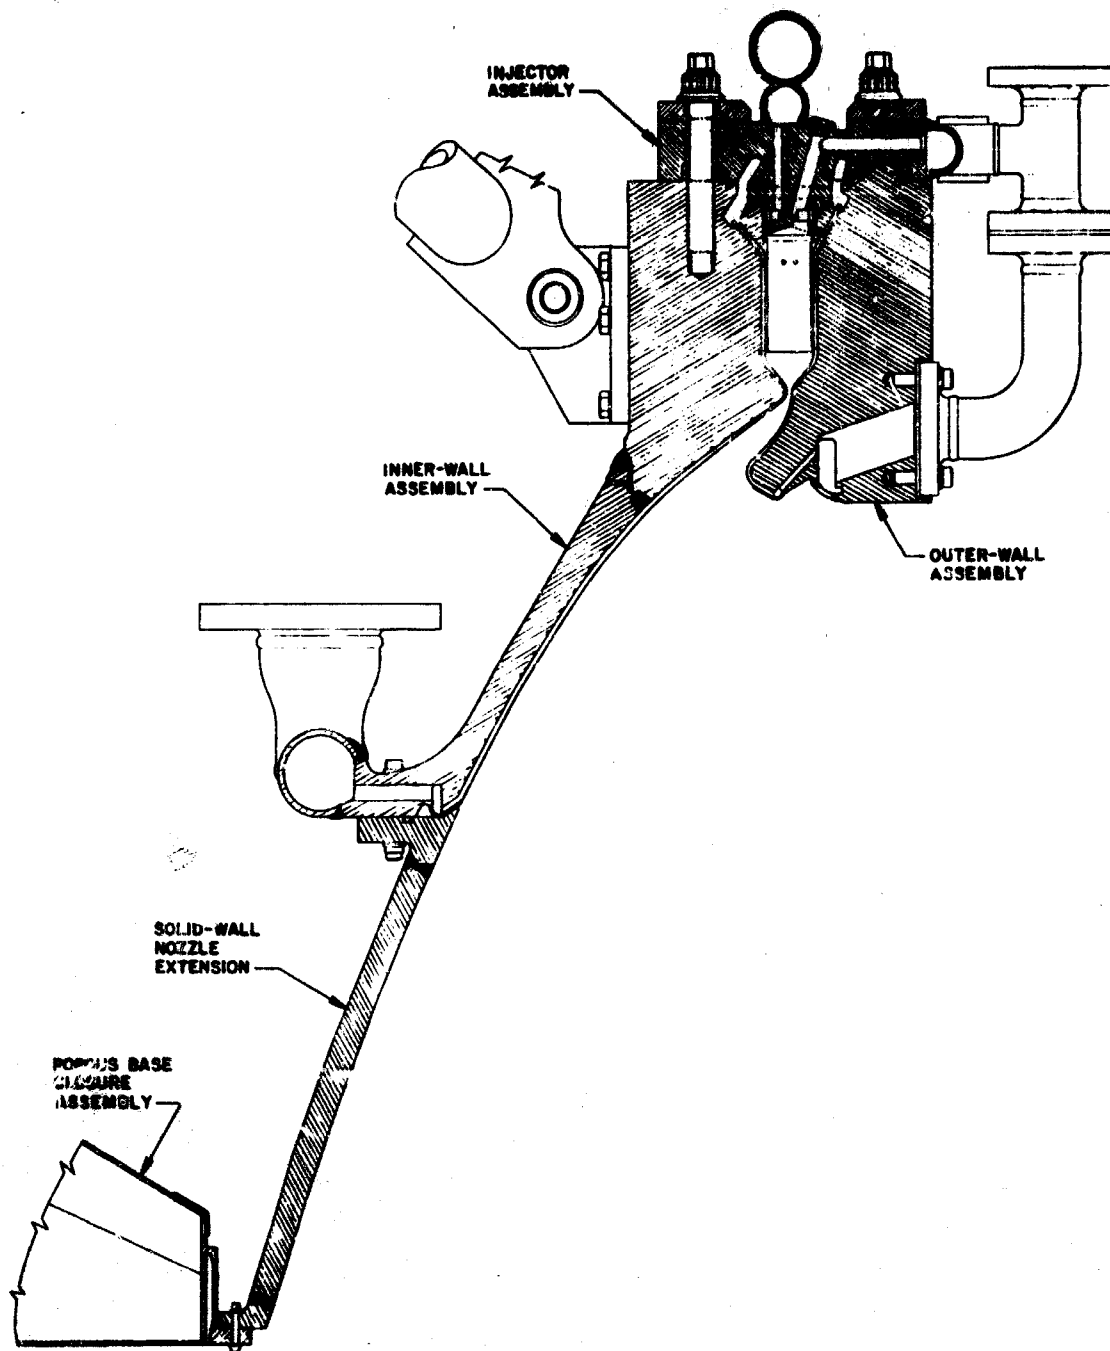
ADP 250K Thrust Chamber Tube-Wall Assembly
